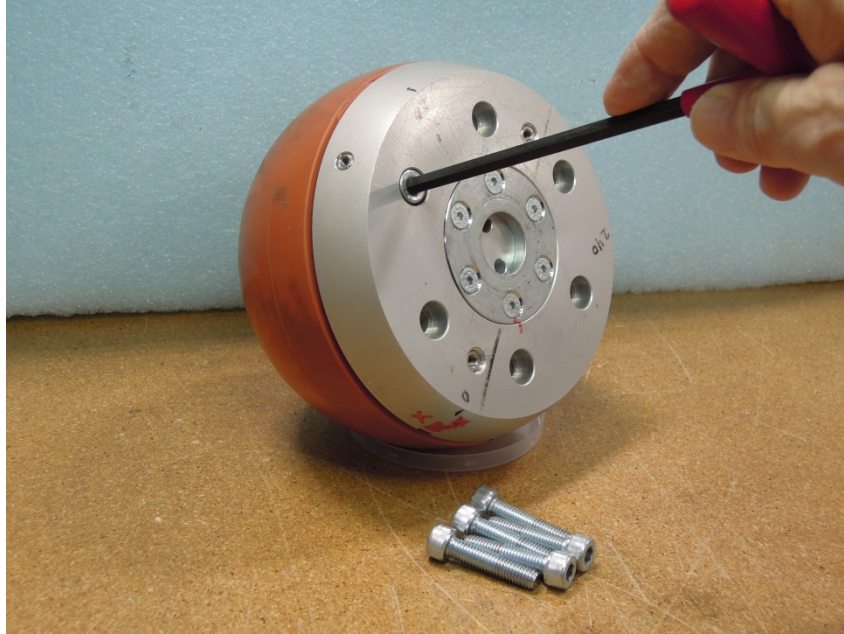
Attachment of the back plate assembly to the skull casting assembly
